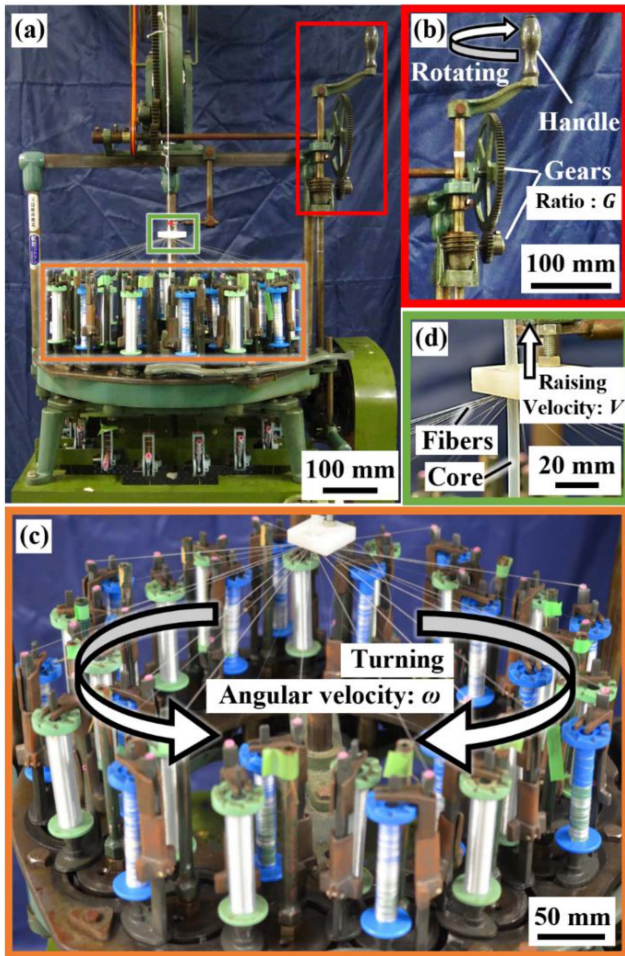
Braider machine: (a) Appearance; (b) handle and gears; (c) bobbins; and (d) gathering point of the fibers.
